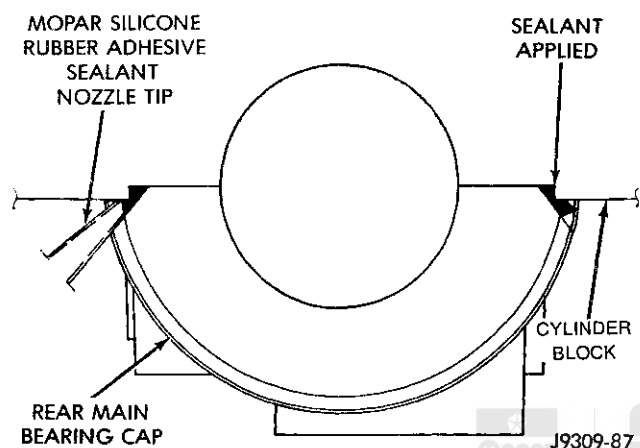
Apply Sealant to Bearing Cap-to-Block Joint
